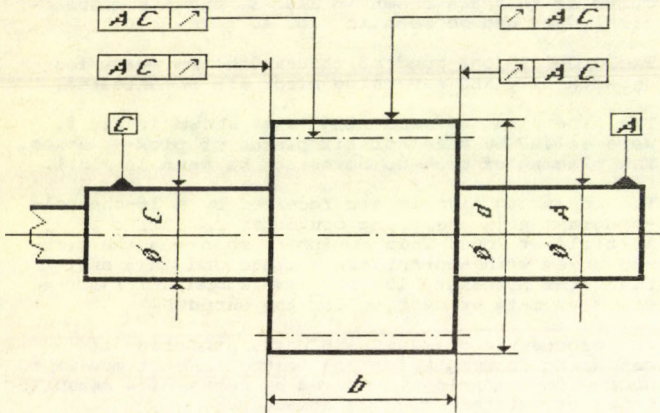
Sizes measured on driving and driven wheels of a rotary gear pump
